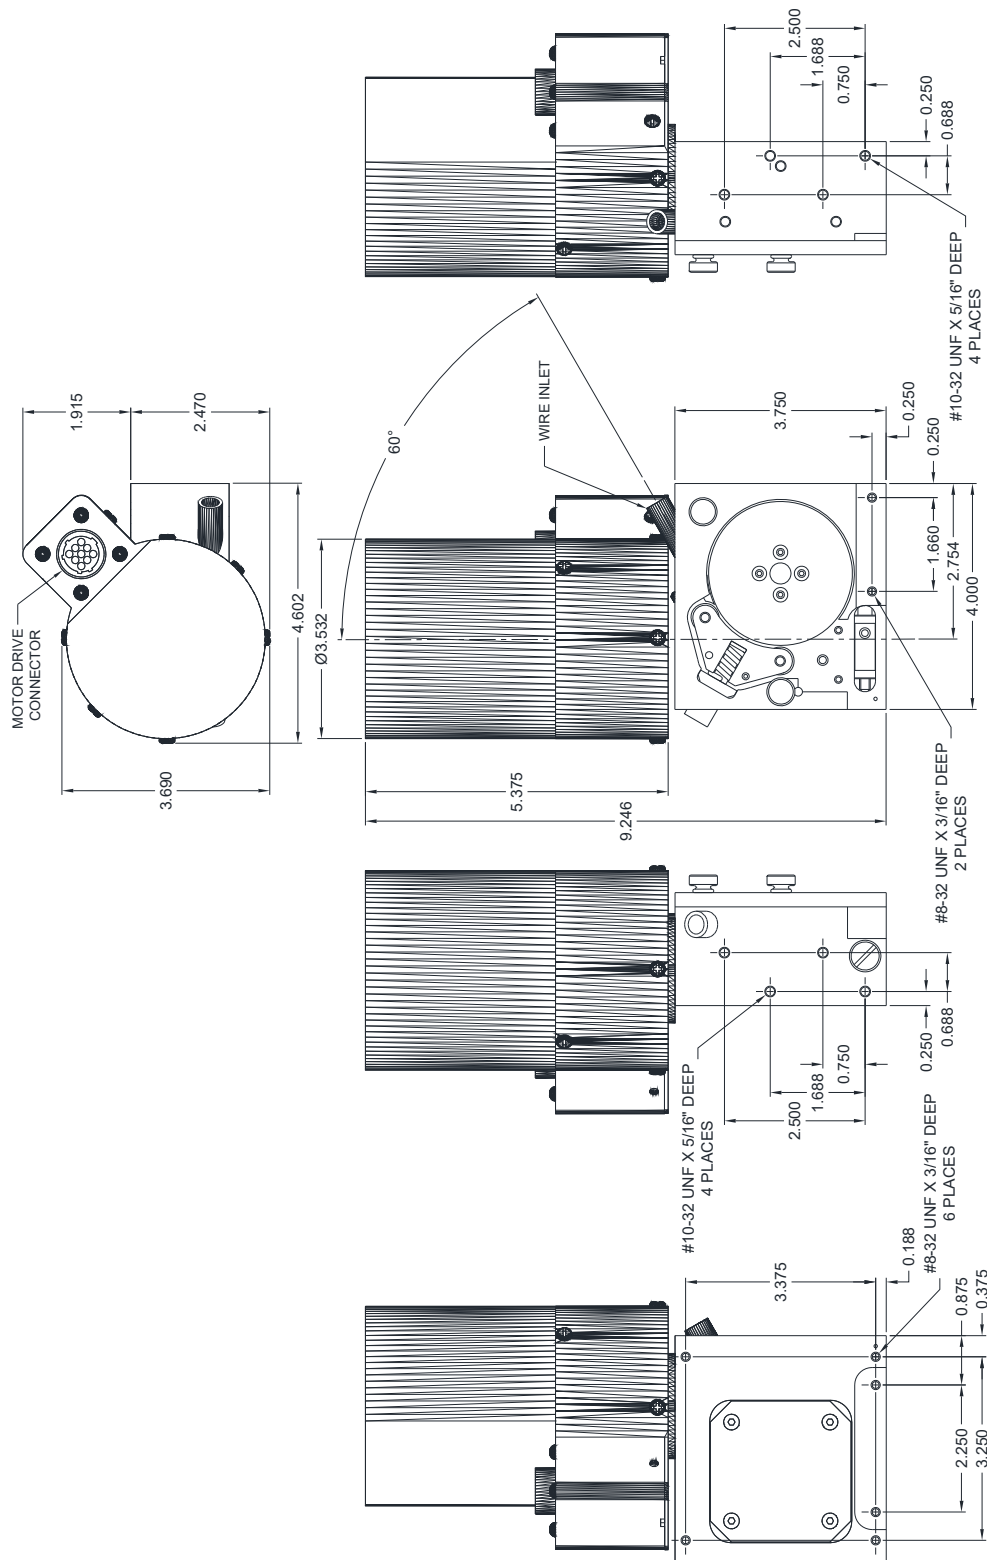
Standard Speed Opposite Hand Capstan Mounting Dimensions
